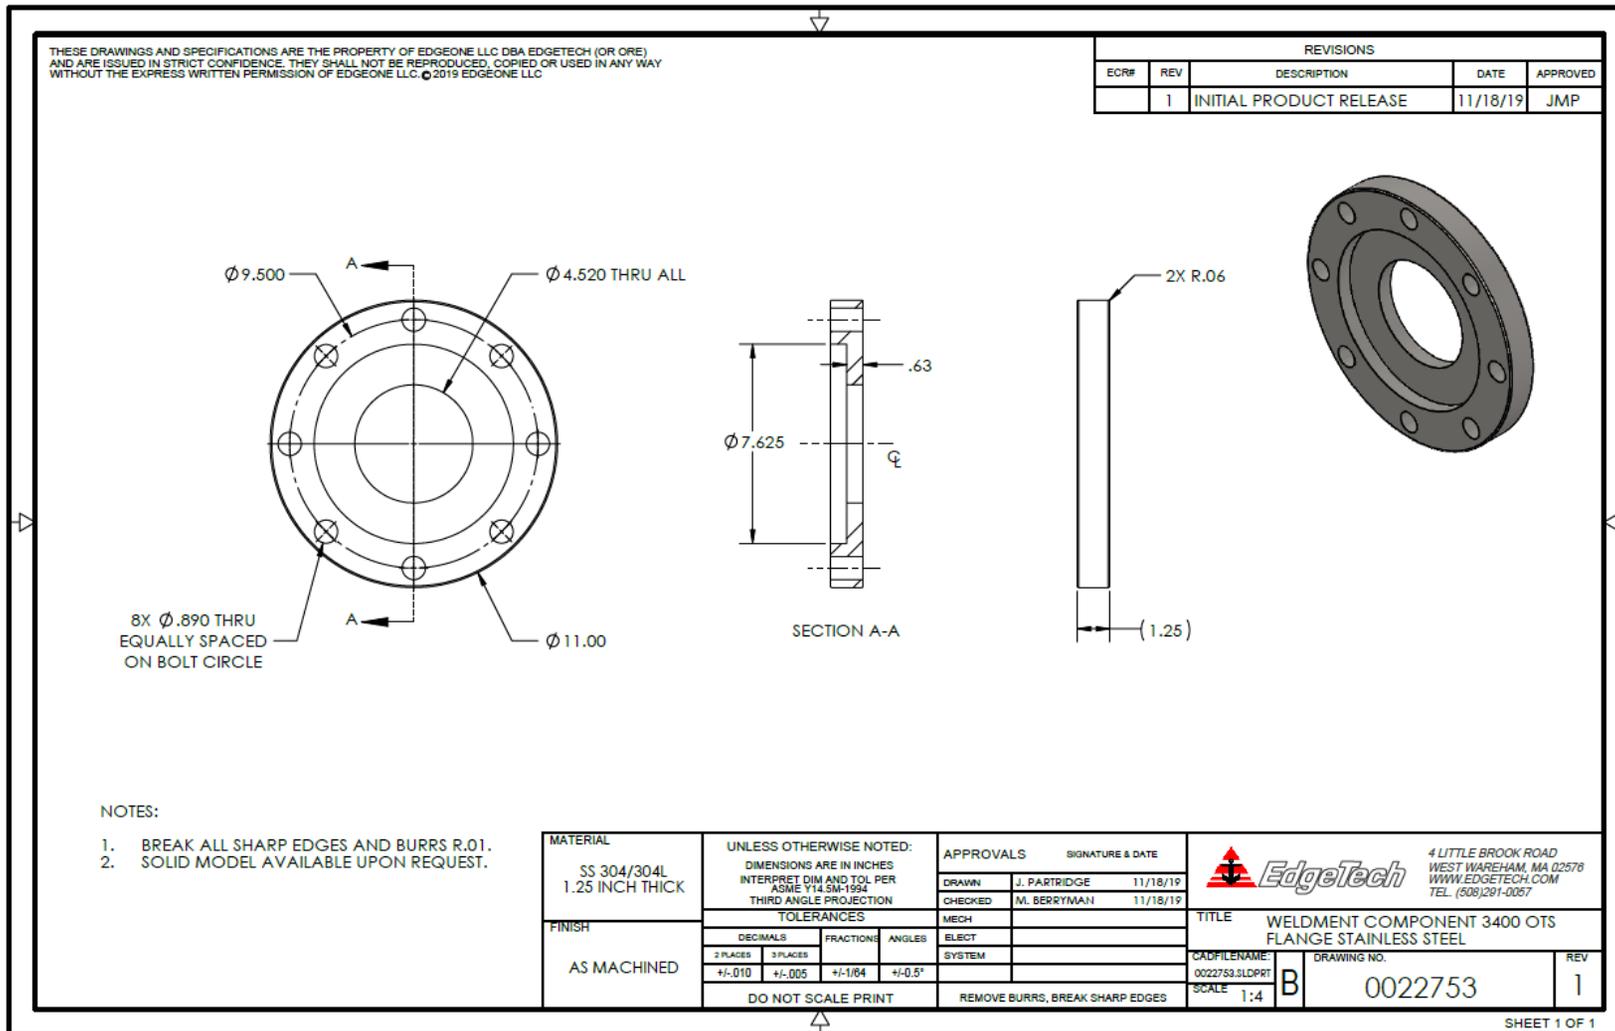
3400 OTS LF Vehicle Mounting Flange
